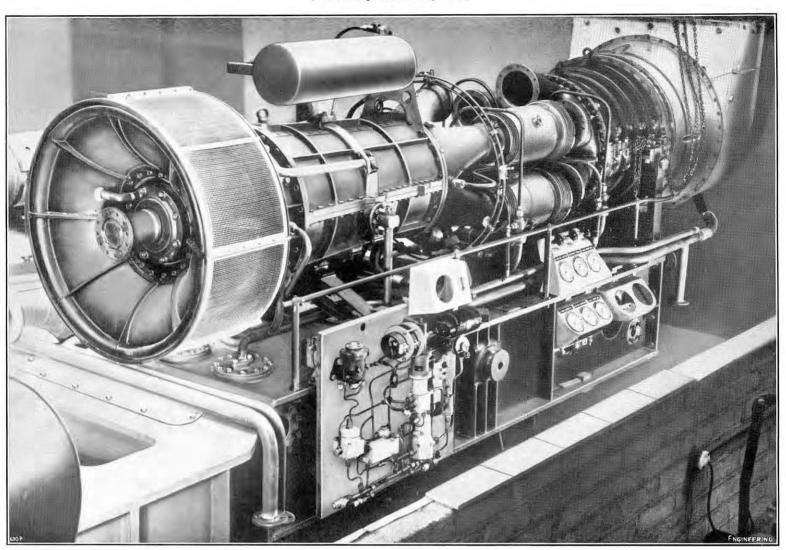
GAS-TURBINE POWER UNIT PARTLY ASSEMBLED.
